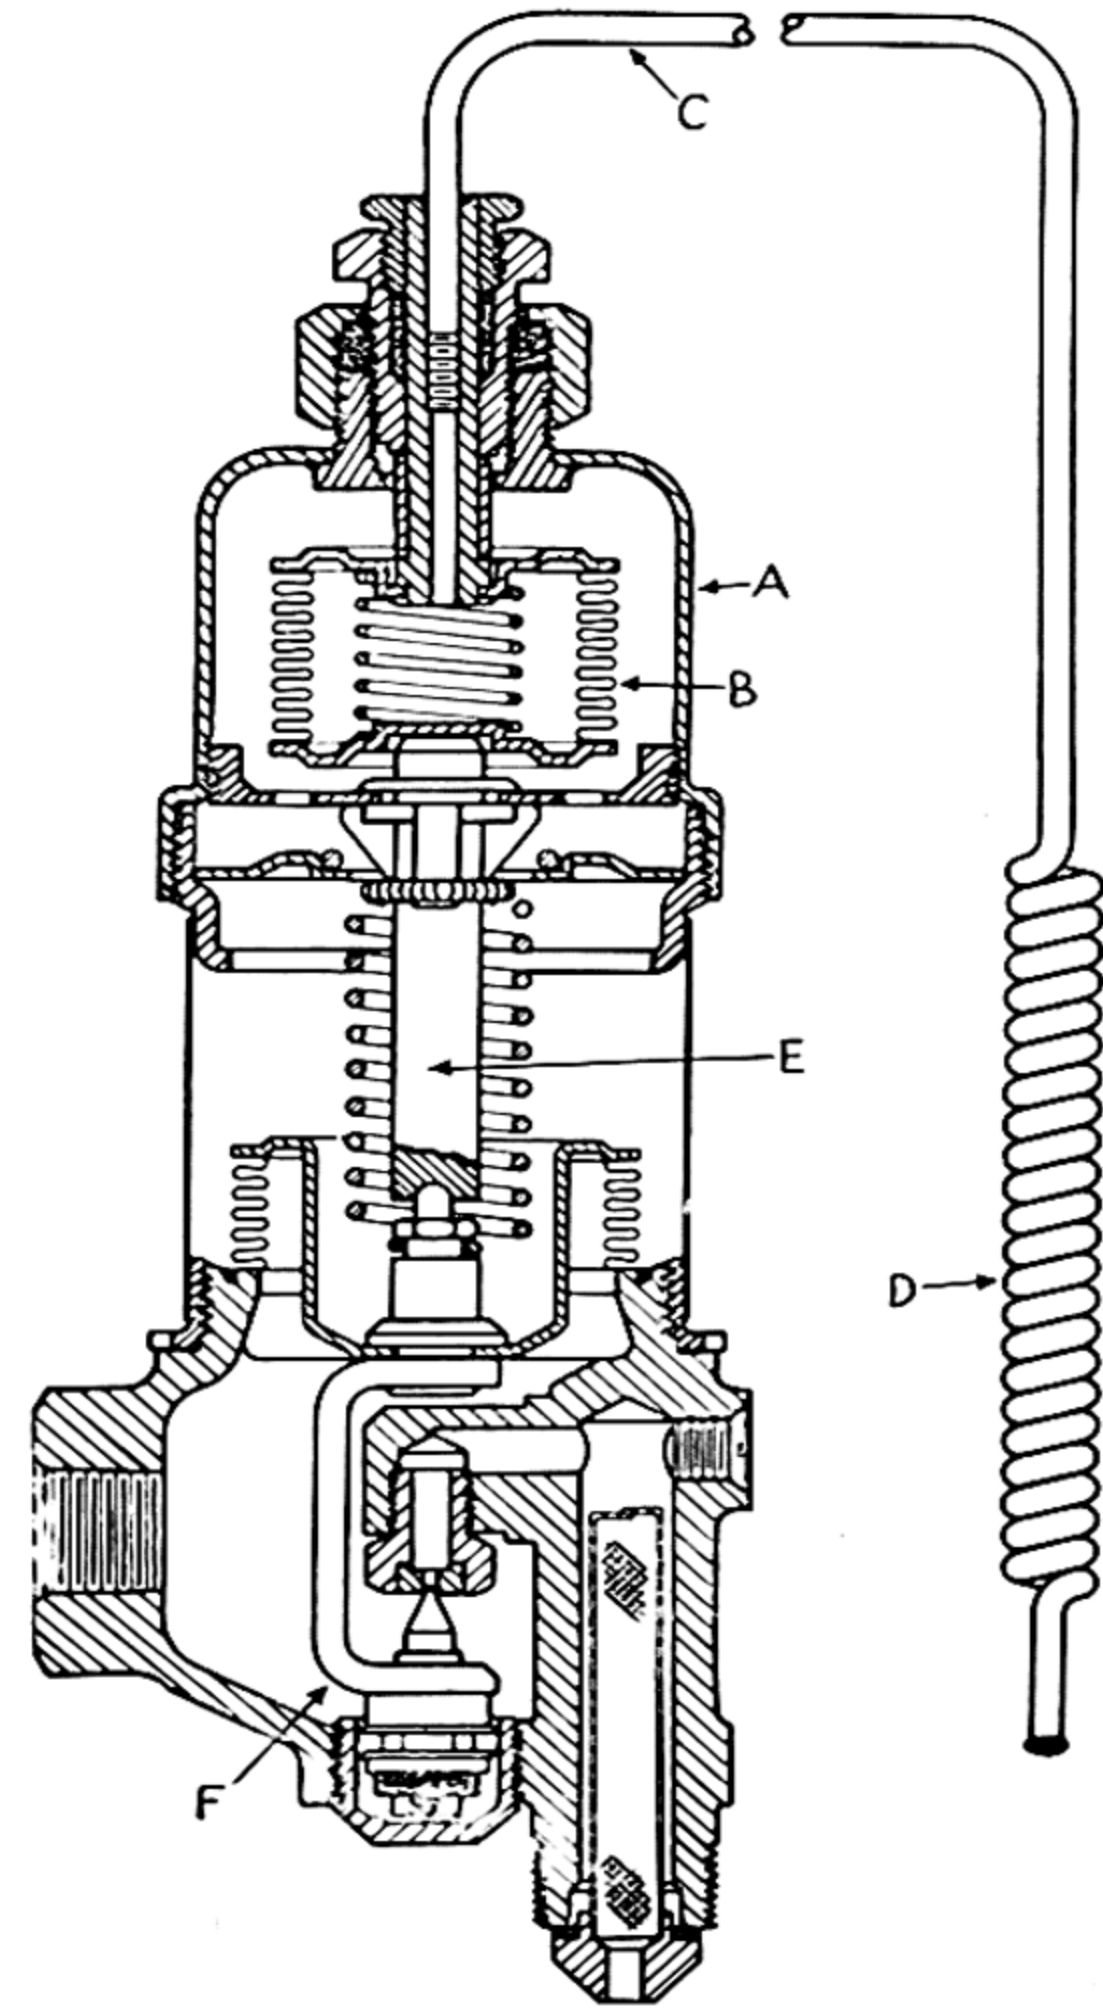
Thermostatic expansion valve. Courtesy Detroit Lubricator Co.
